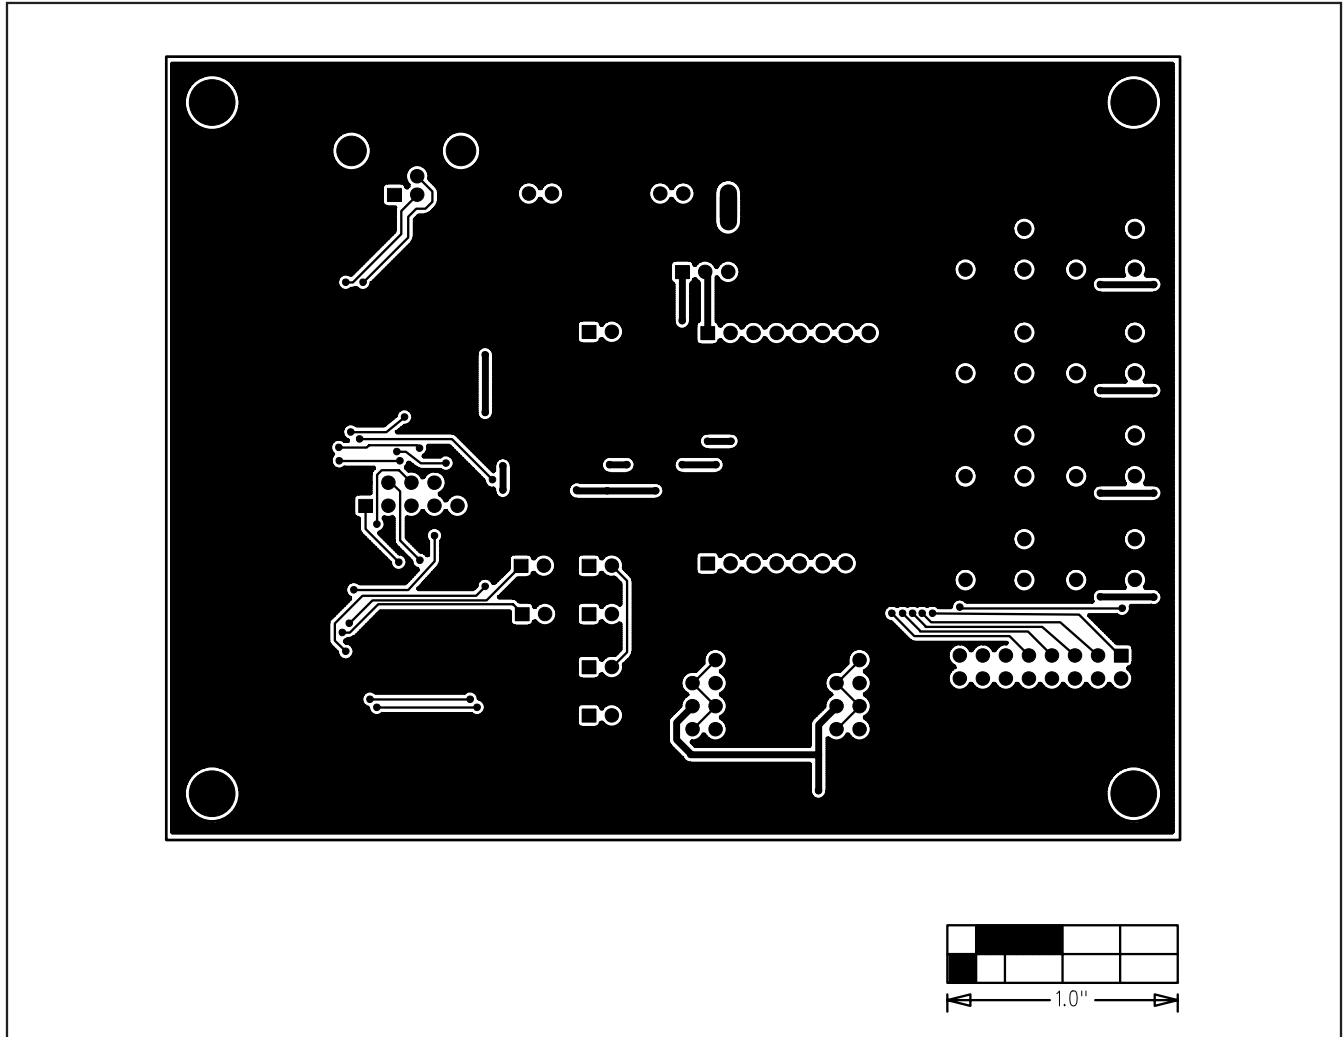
MAX7319 EV Kit PCB Layout—Solder Side
